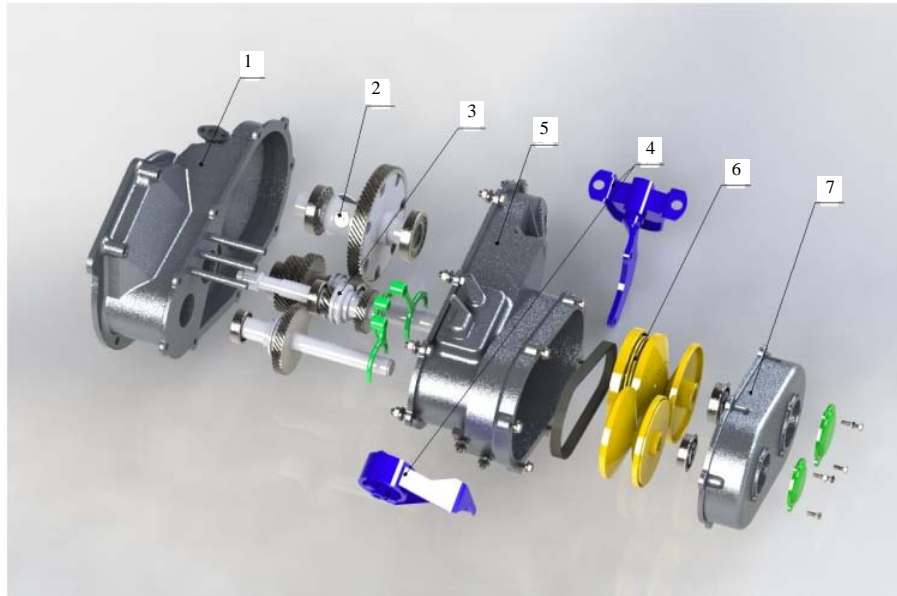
Transmission design: 1) Gearbox cover; 2) Cylindrical main gear; 3) Reverse rotation mechanism; 4) Mounting brackets to the car body; 5) Variator housing; 6) V-belt drive and 7) V-belt gear cover
